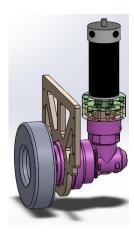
, above: Wheel mount, 51:1 gearbox and motor configuration.
